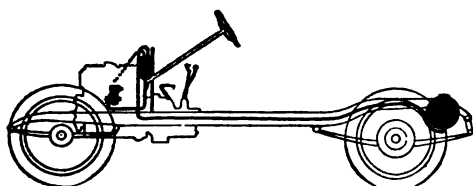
Typical vacuum feed system. Fuel tank at rear and vacuum tank in front higher than carburetor. (Oakland Motor Co.)
